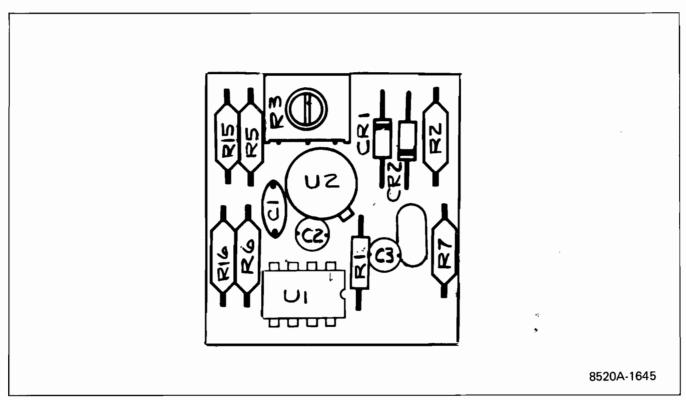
B. A3A1 Ref Amp PCB Assembly (Vertical)
